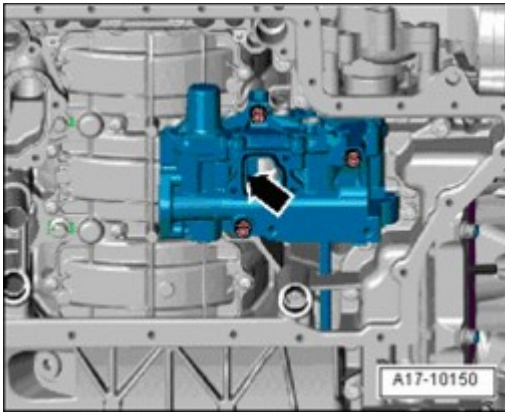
Checking Whether Drive Shaft Is Friction Locked To Oil Pump
